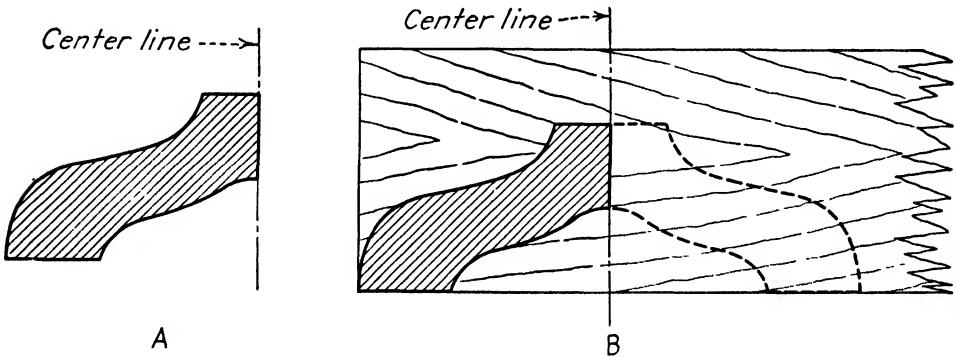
Patterns, or templates, are convenient and ensure accuracy in laying out irregular designs. A, a pattern; B, the pattern in place for marking the left half. To mark the right half, simply reverse the pattern.
